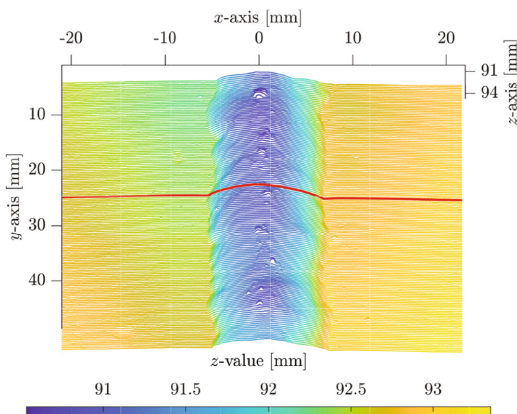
Point cloud from a scanned weld before treatment consisting of closely spaced 2D weld profiles. A random weld profile is highlighted as the red line. Note that the parts of the point cloud that do not contain the weld have been removed; hence, the y -axis does not start from 0. Furthermore, the distance values of the z -axis indicate the distance to the origin of the scanner
